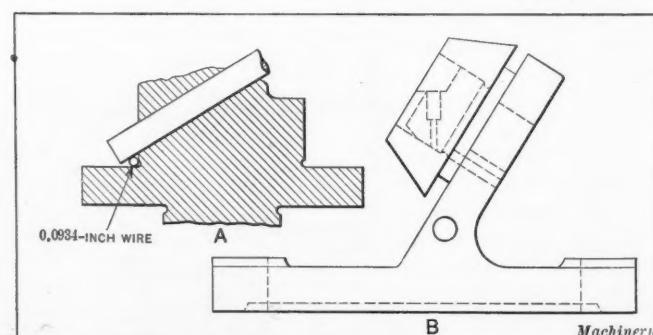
Jig for drilling Flash Hole in Top Fuse Ring
